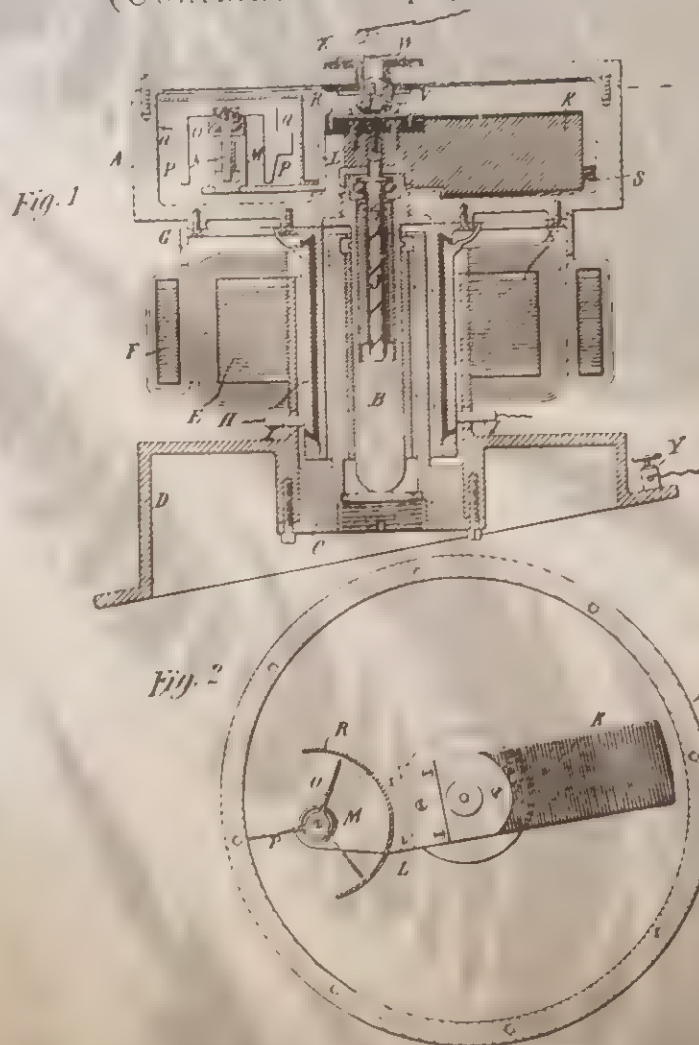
Electrical Oscillator, Illustrated in Fig. 15, Showing Details of Motor and Break Mechanism.
